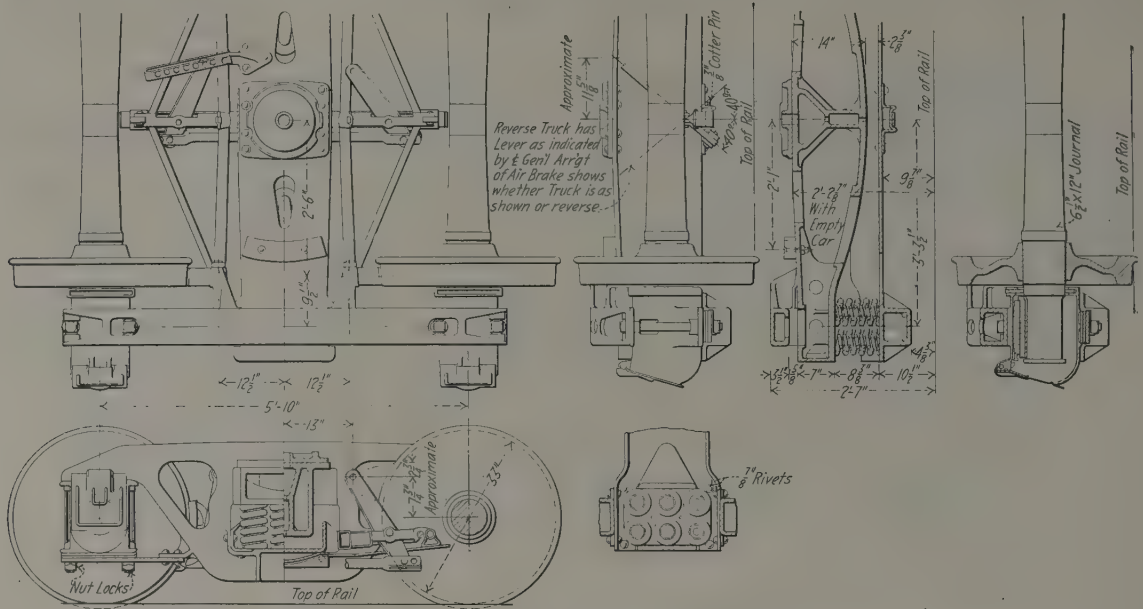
General Arrangement of Pennsylvania Railroad Truck with Crown Cast Steel Side Frame.
